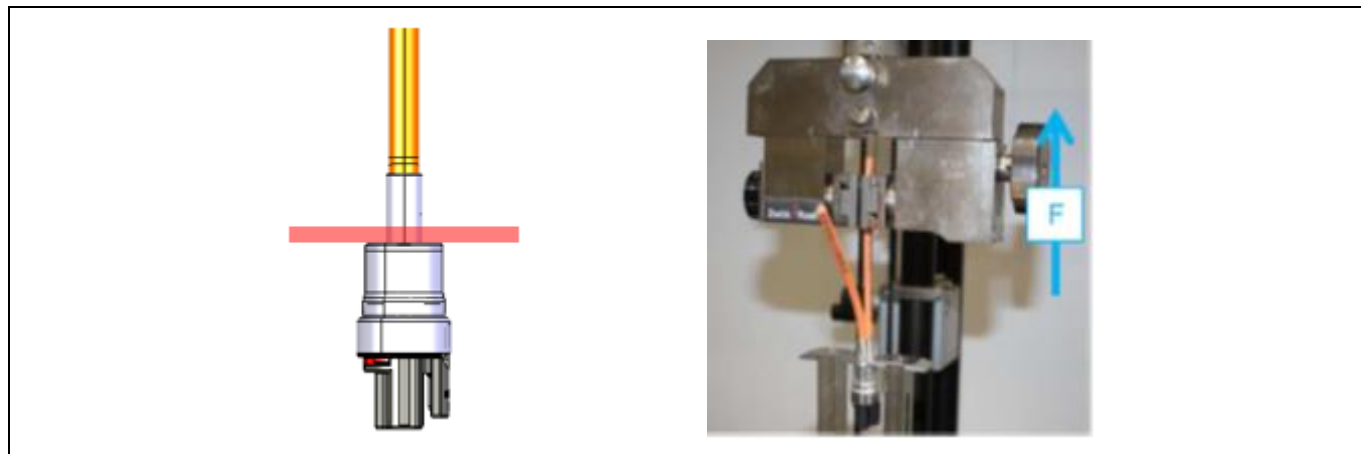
Representation 6.0 mm² SCC dimension D24 and D25 (4.9.1 Cable shielding crimping using two half-shells)
